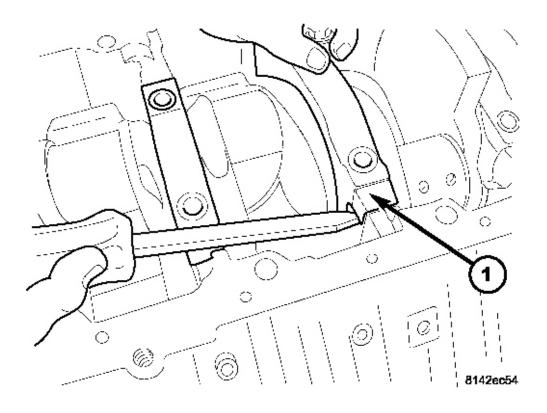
Main Bearing Cap Removal Courtesy of CHRYSLER LLC
